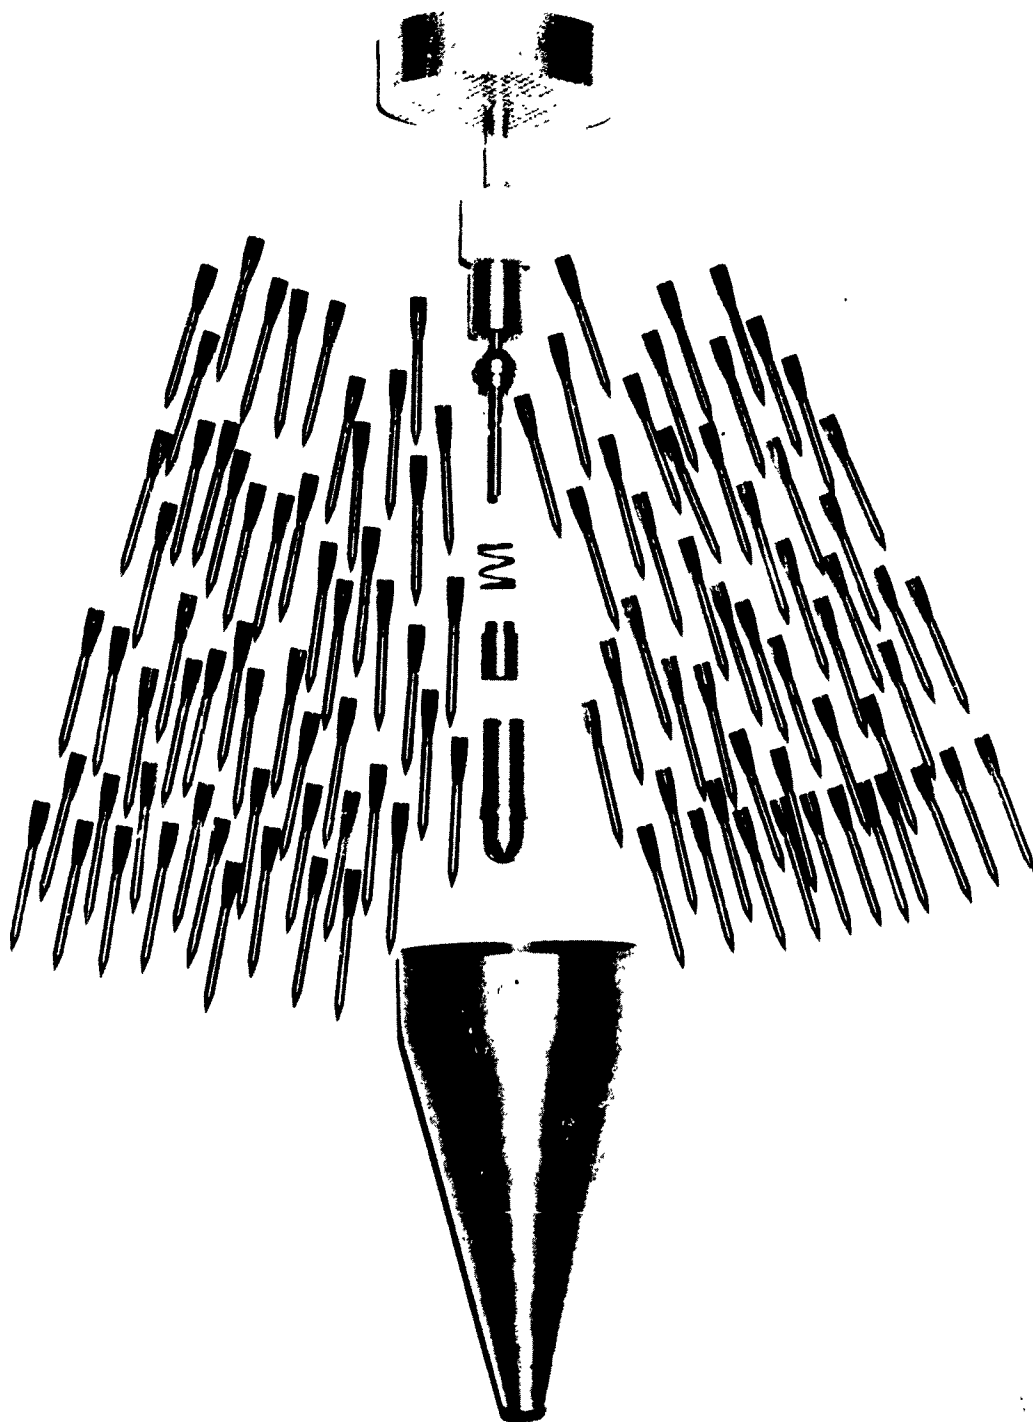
DISASSEMBLED WOX-9A WARHEAD
